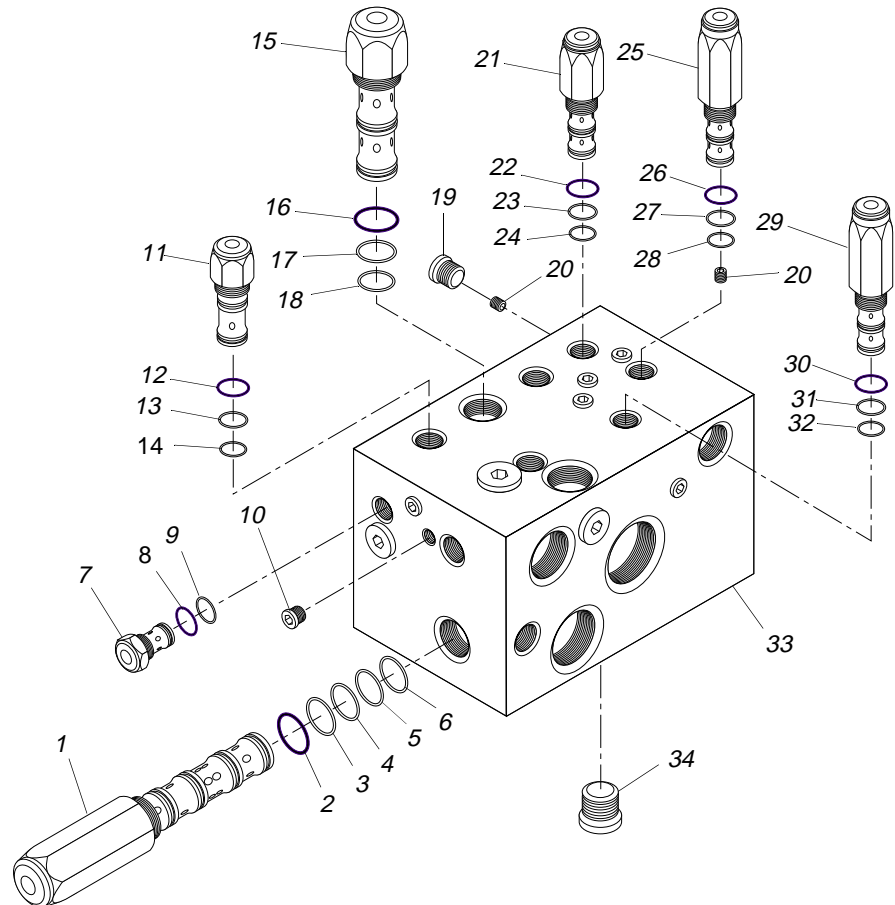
Hydraulic Control Manifold Block Fittings Removal/Installation
